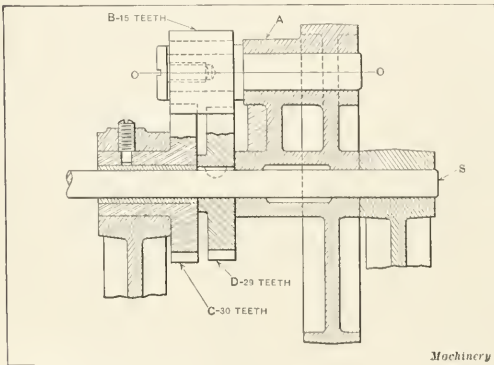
Epicyclic Gear consisting of Two Central Gears (One stationary) and Arm which carries Wide Faced Planetary Gear
